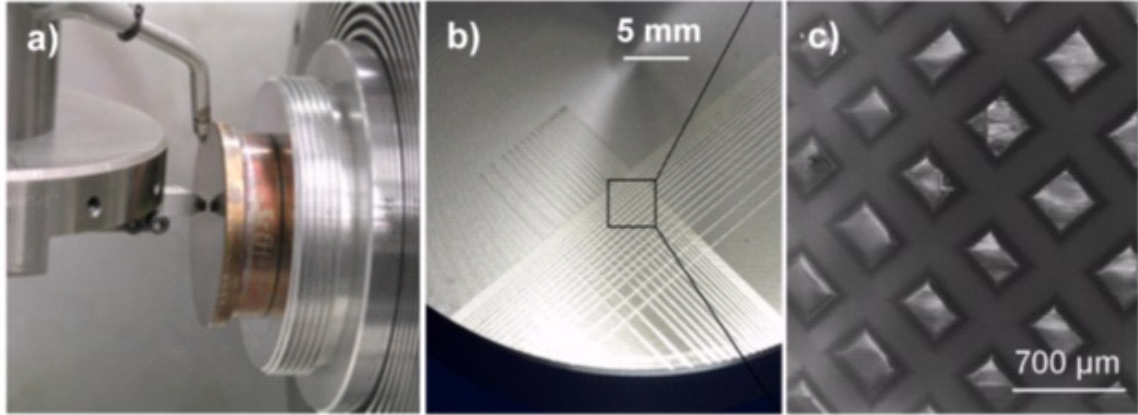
a) Diamond turning of a sol-gel coated steel mold b) steel mold with a micro-machined sol-gel derived coating c) SEM image of the micro-machined coated surface [2].
